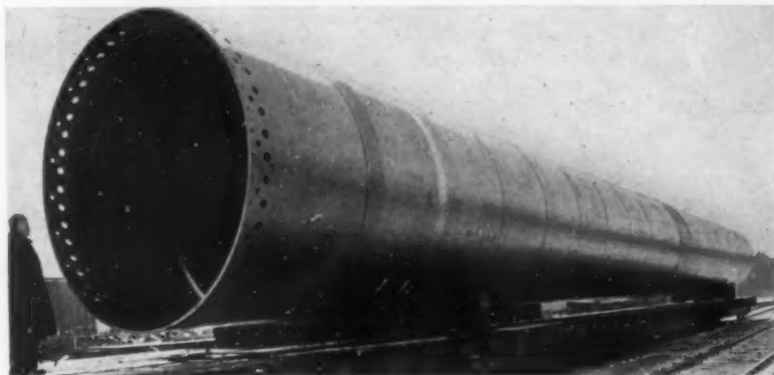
One section of one of the largest rotary kilns ever built, 475 ft. long, requires three flat cars
